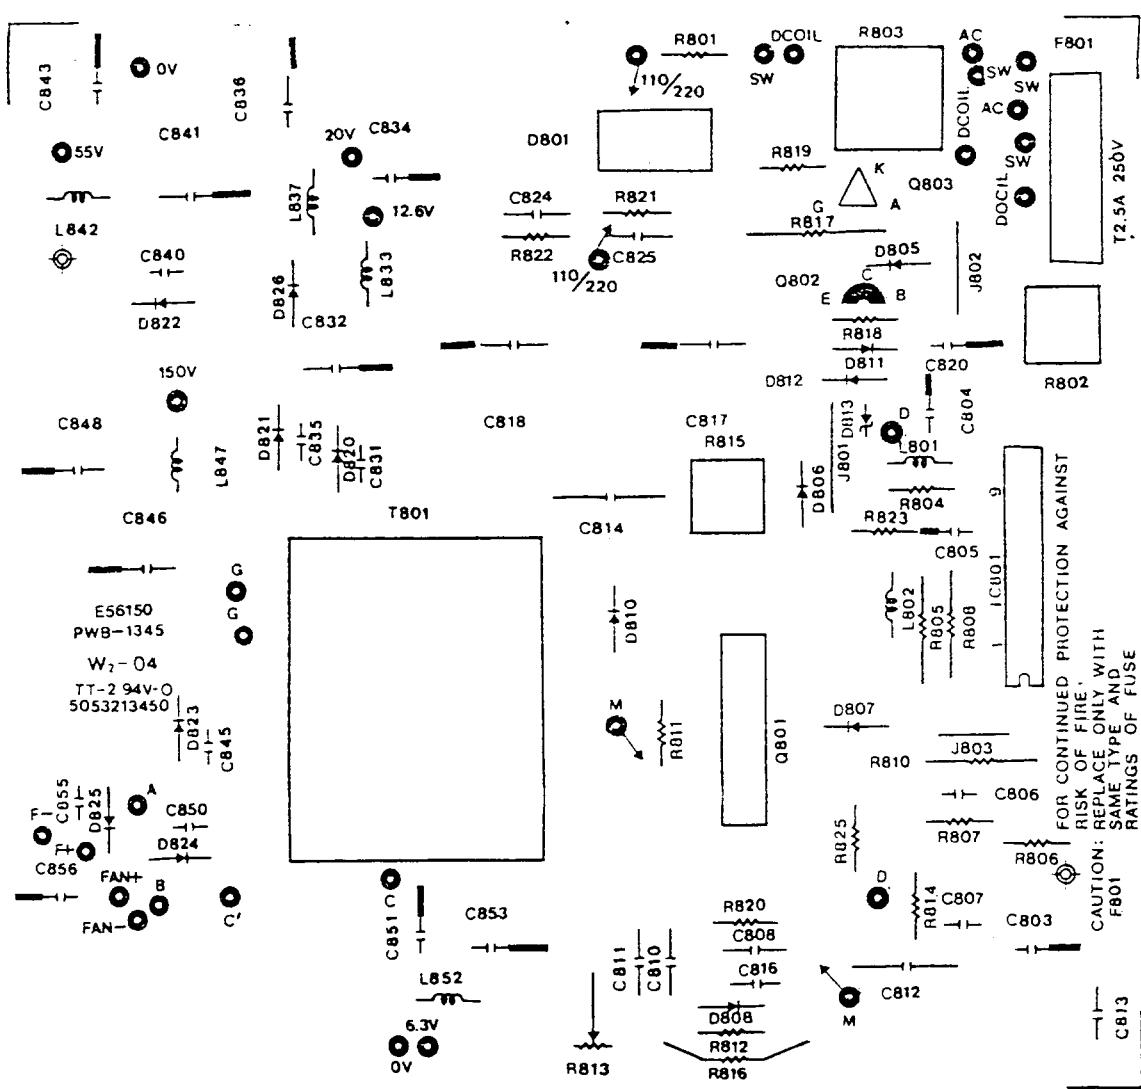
PCB-POWER COMPONENTS LAYOUT
